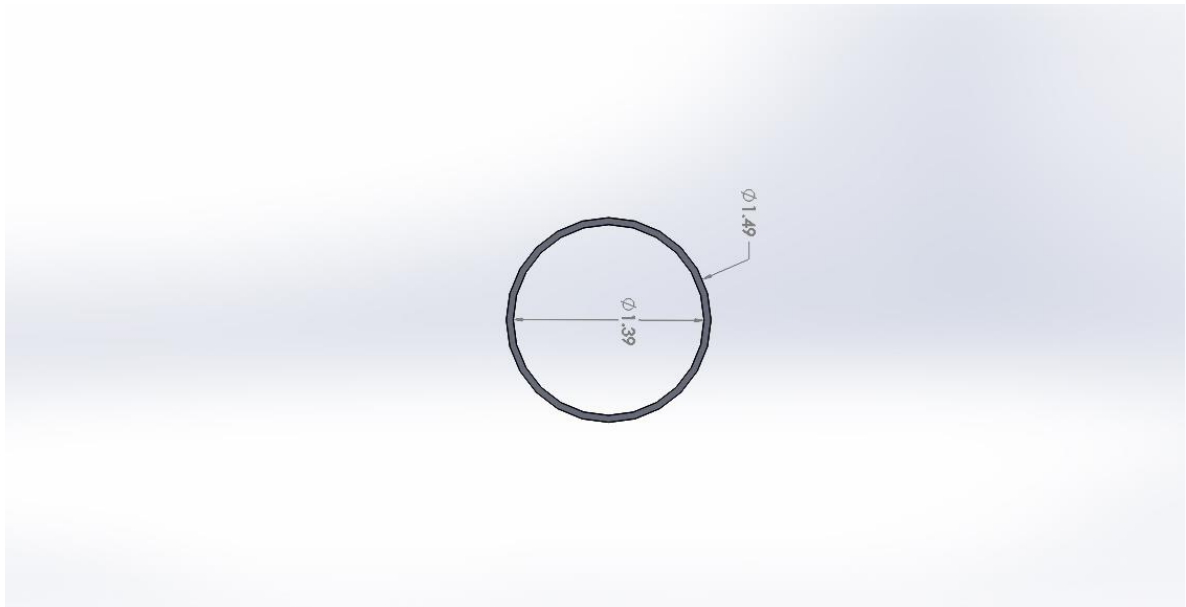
Hollow Steel Pipe (all dimensions in inch)
